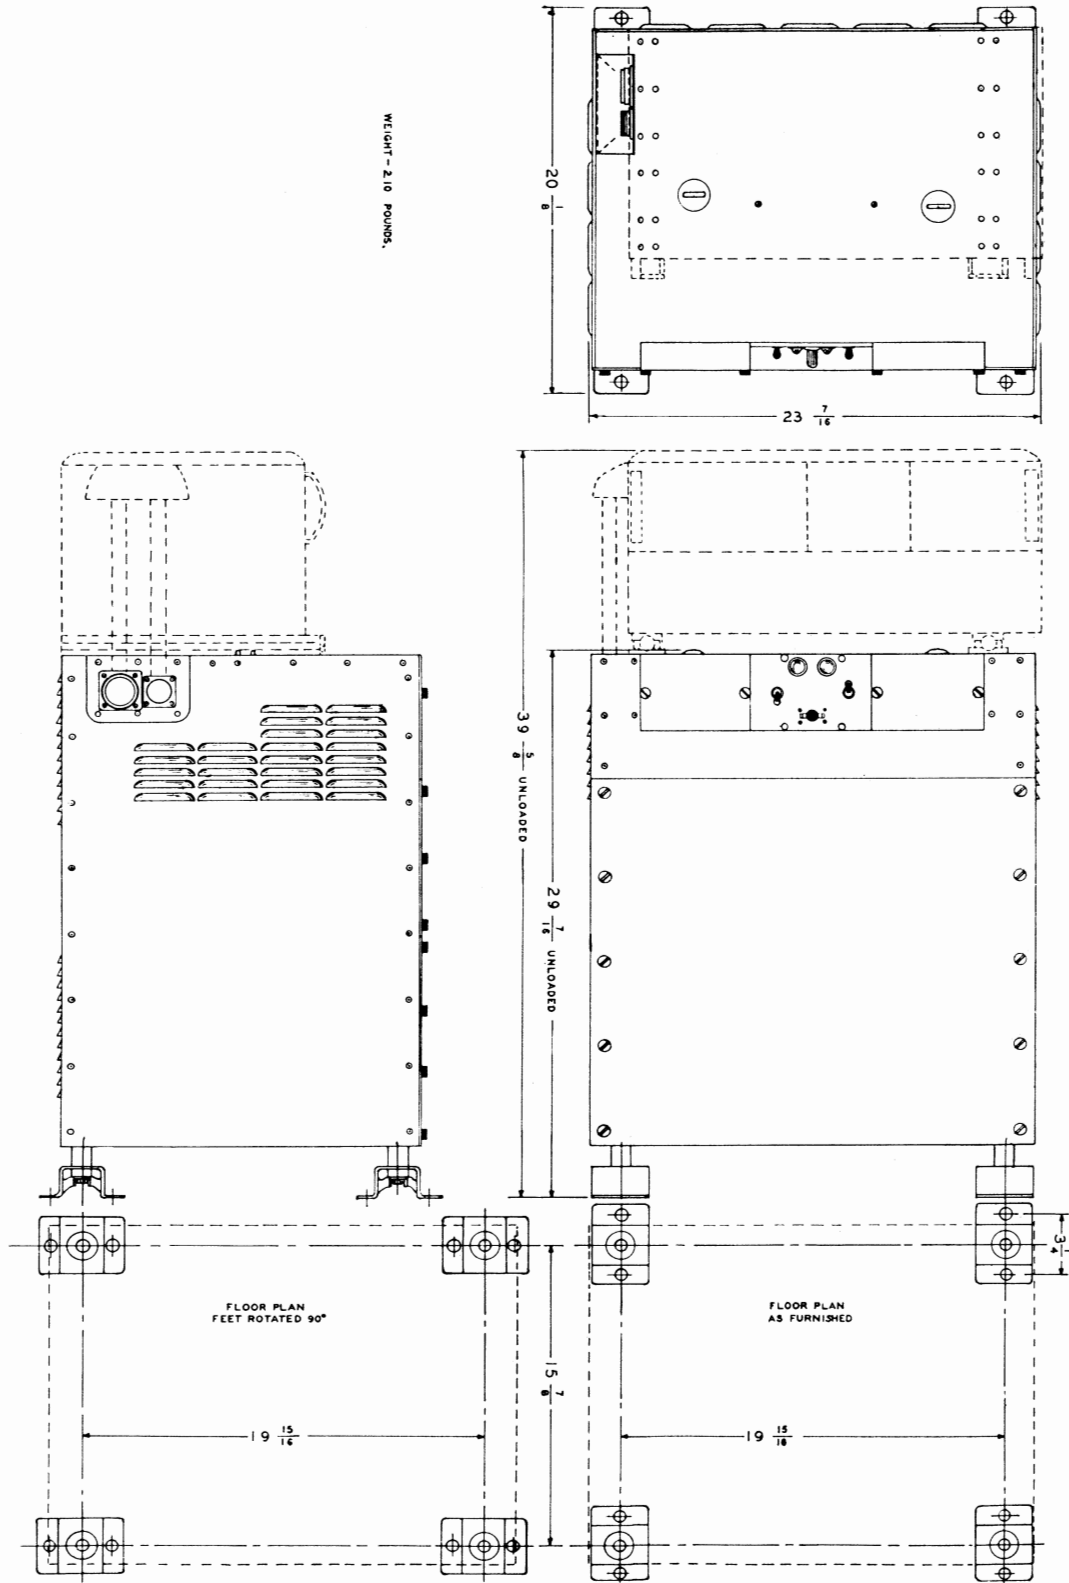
Type COL-211102 Dynamotor Assembly Installation Diagram (Dwg. No. K1084C)
